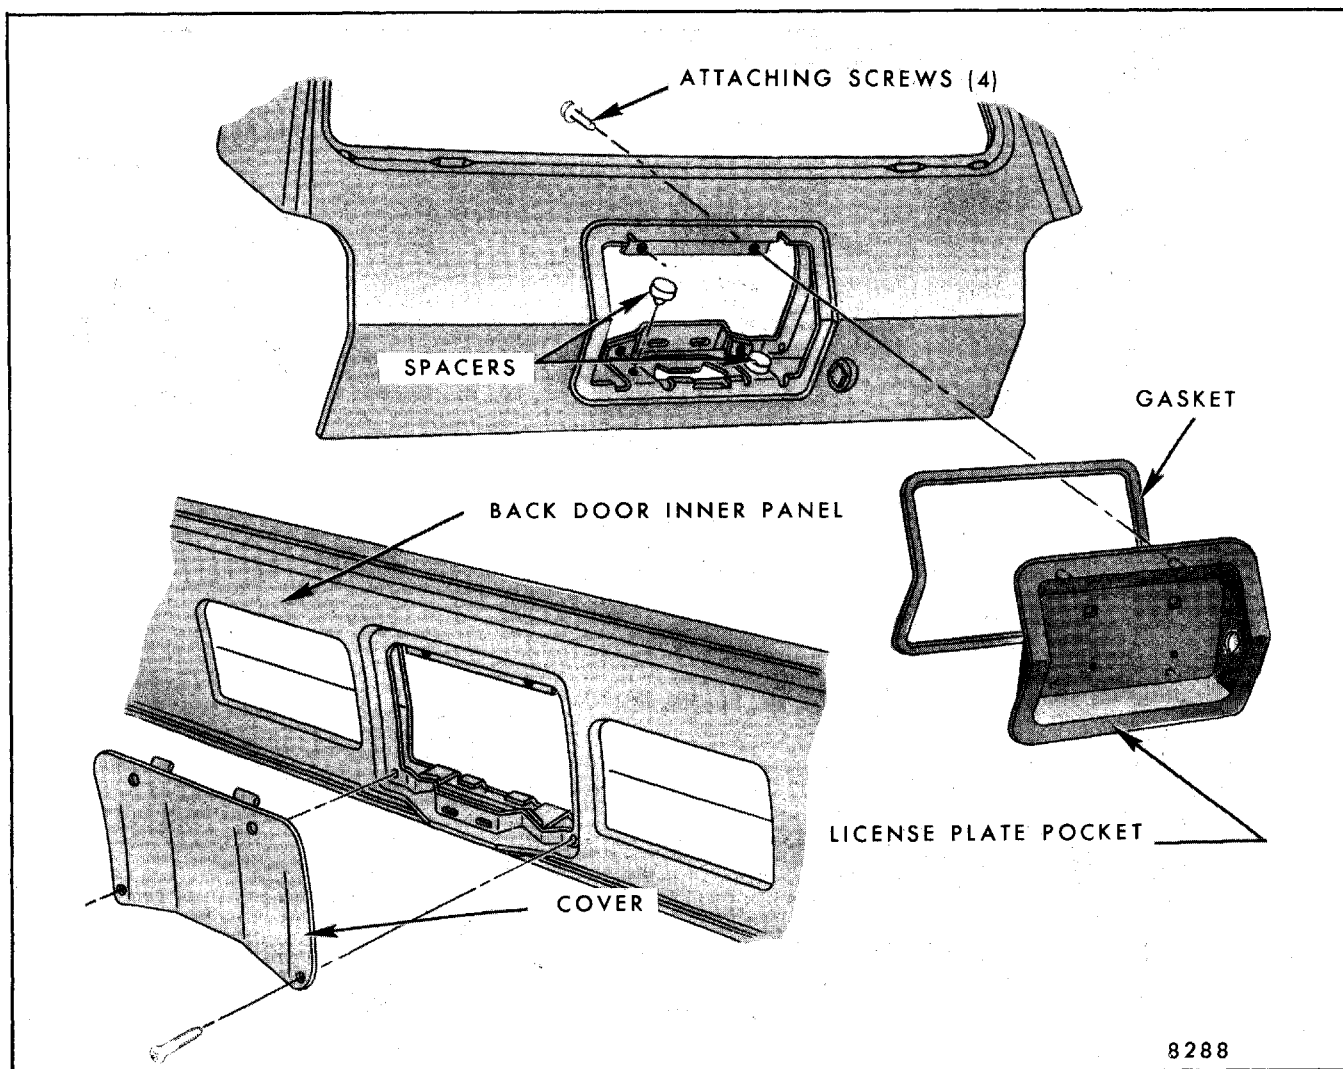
License Plate Pocket and Inner Cover - "H-15" Styles
